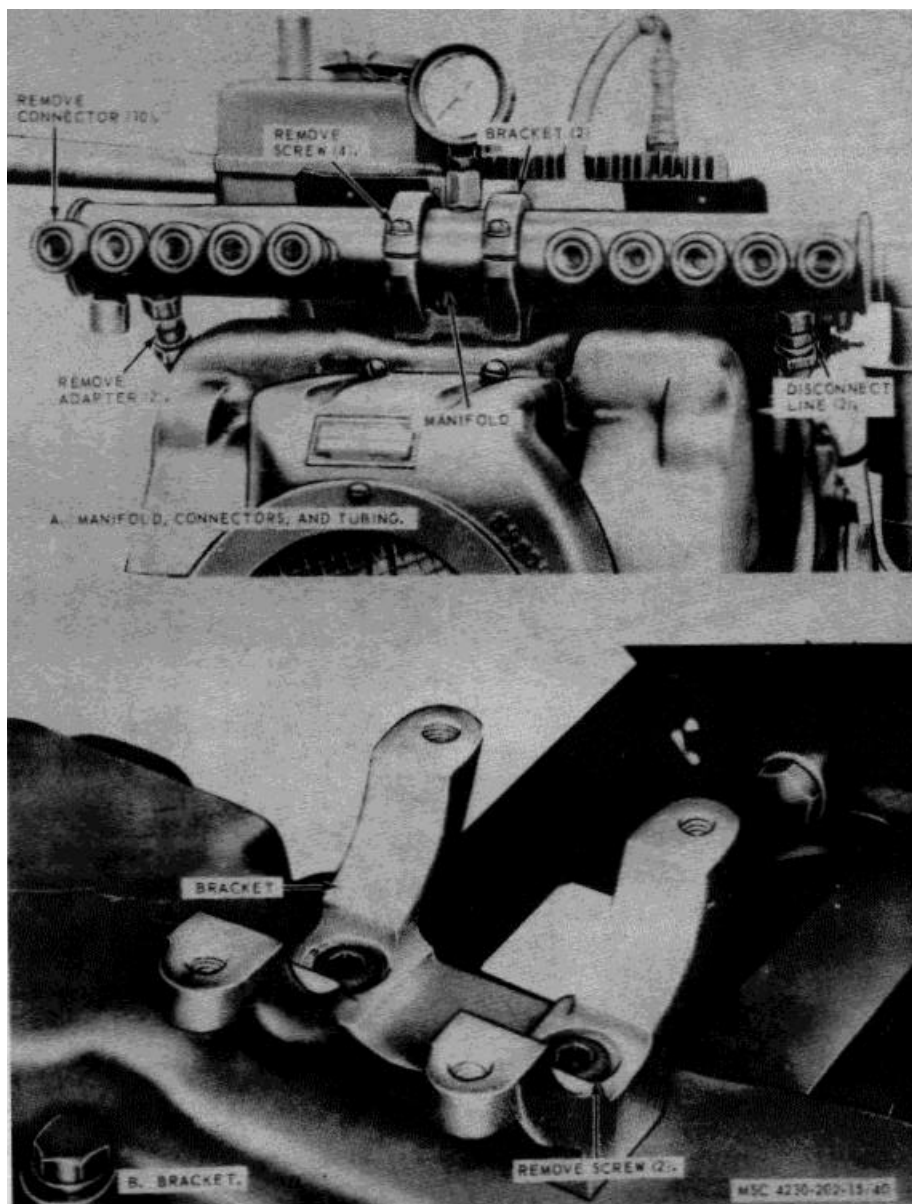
Manifold, clamps, bracket, tubing and connectors, removal and installation
